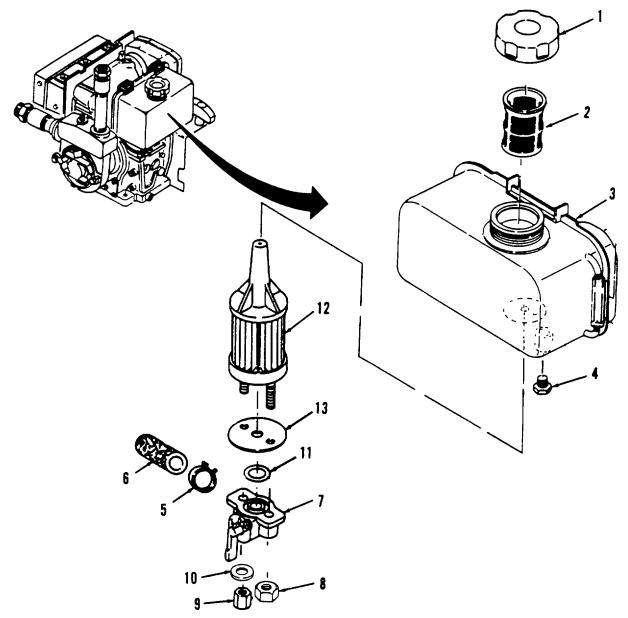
Fuel Cock and Fuel Filter, Outlet Replacement. 4-67
